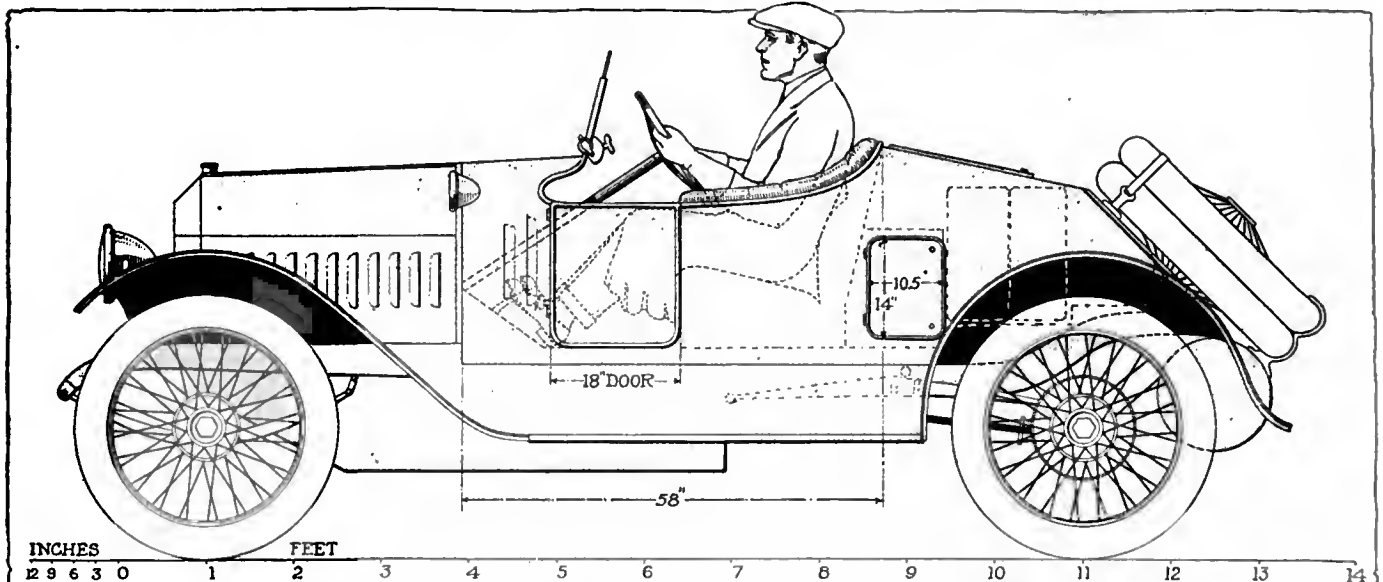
Side elevation to scale of suggested runabout design adapted to chassis of Edwards-Knight 25
